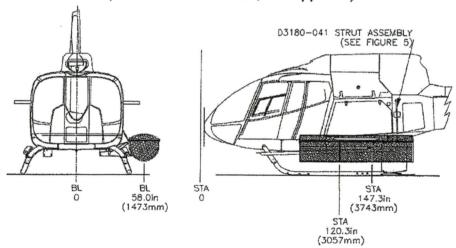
D130-701-043 Heli-Utility-Basket™ Installation (LH Installation Shown, RH Opposite)
